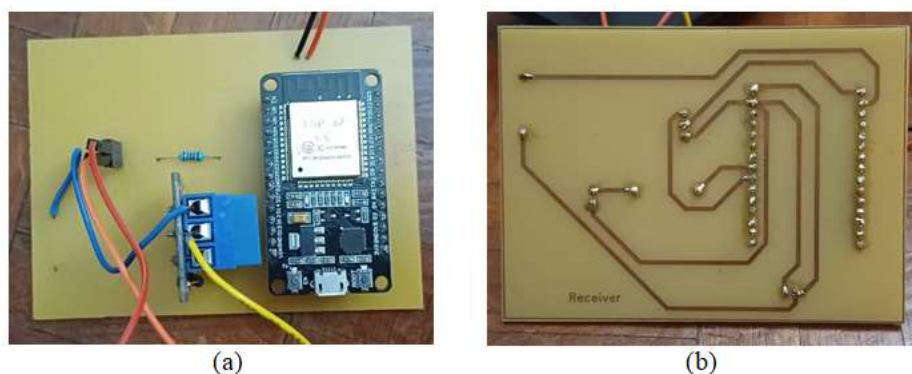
Receiver PCB Board Views: (a) Top View, and (b) Bottom View
